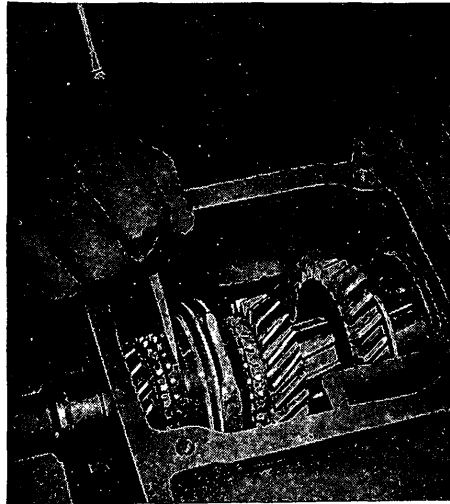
Marking relationship of synchronizer parts to assure correct assembly.
